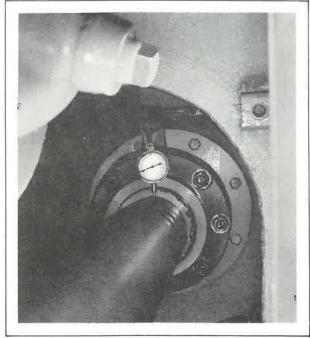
INDICATOR MOUNTED ON COMPRESSOR COUPLING.
